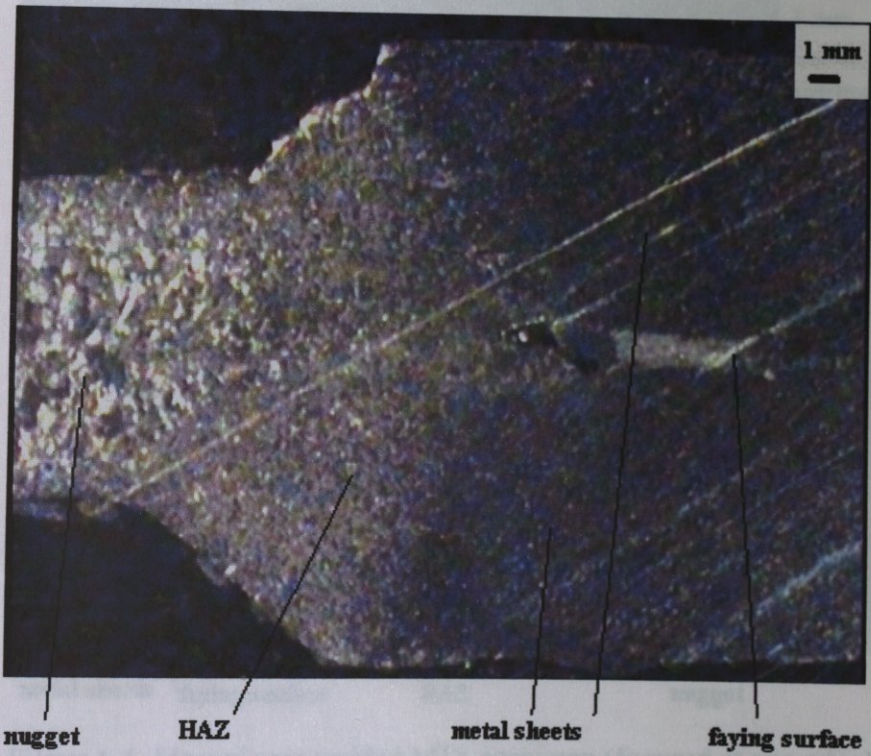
Nipper spot-welded MTS specimen (focused at one edge)
